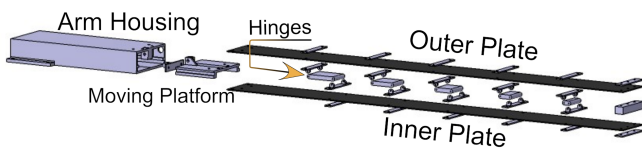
Exploded-CAD drawing of plates with the hinges in between.
